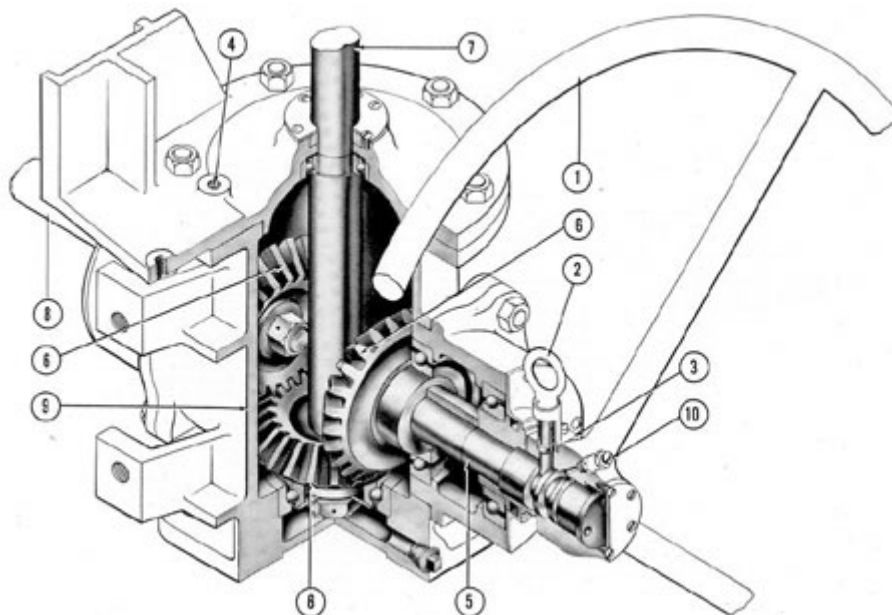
Cutaway of main steering wheel and steering stand gear box.
